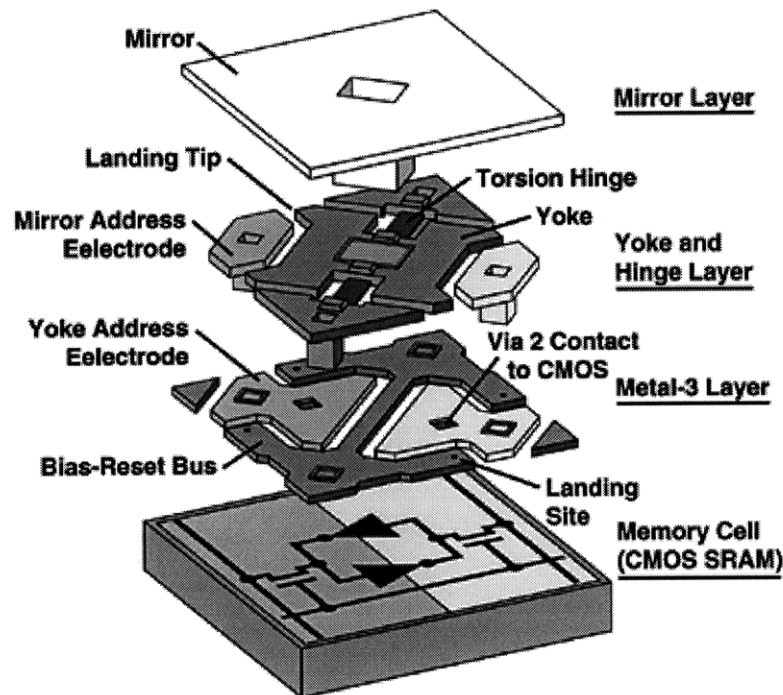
Detailed View of a DLP Mirror Assembly⁵
